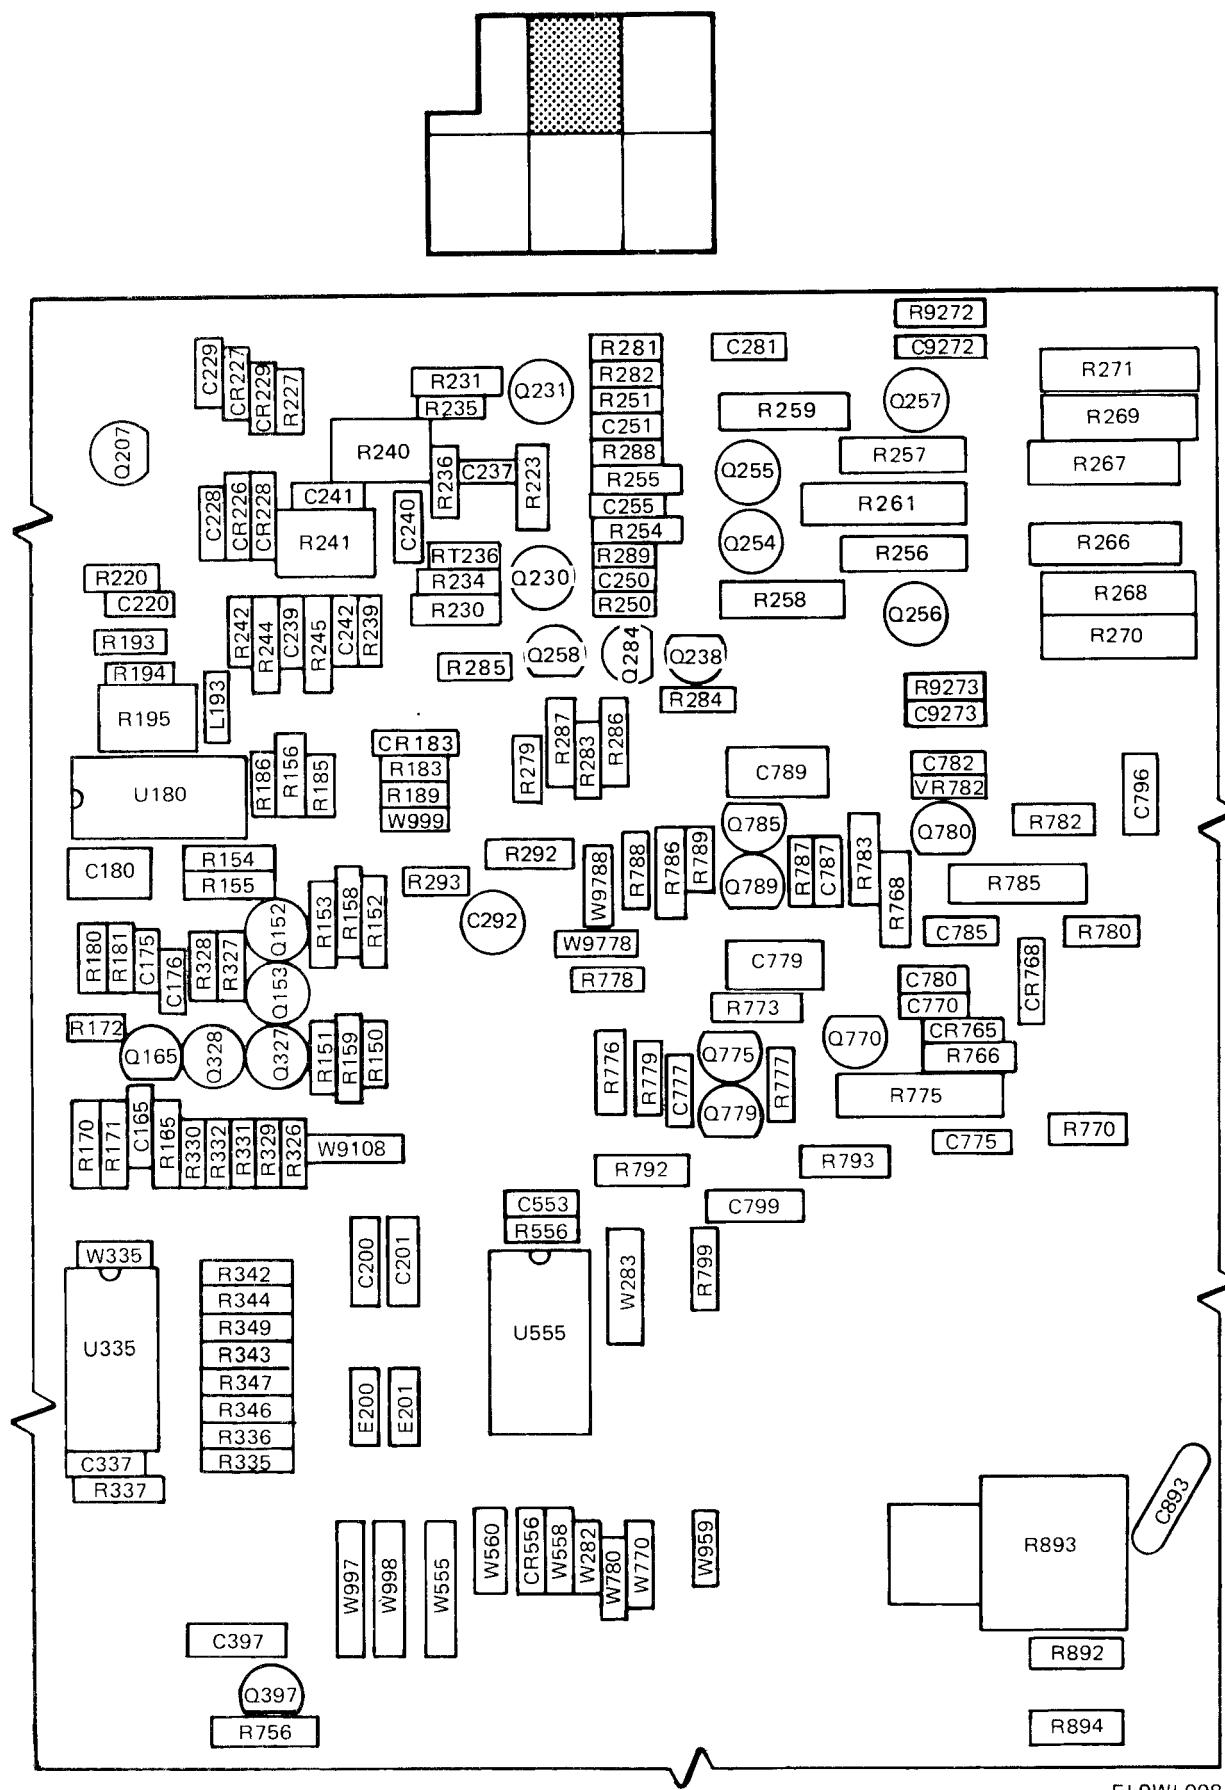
Circuit Card Assembly A1 (Sheet 1 of 11)
